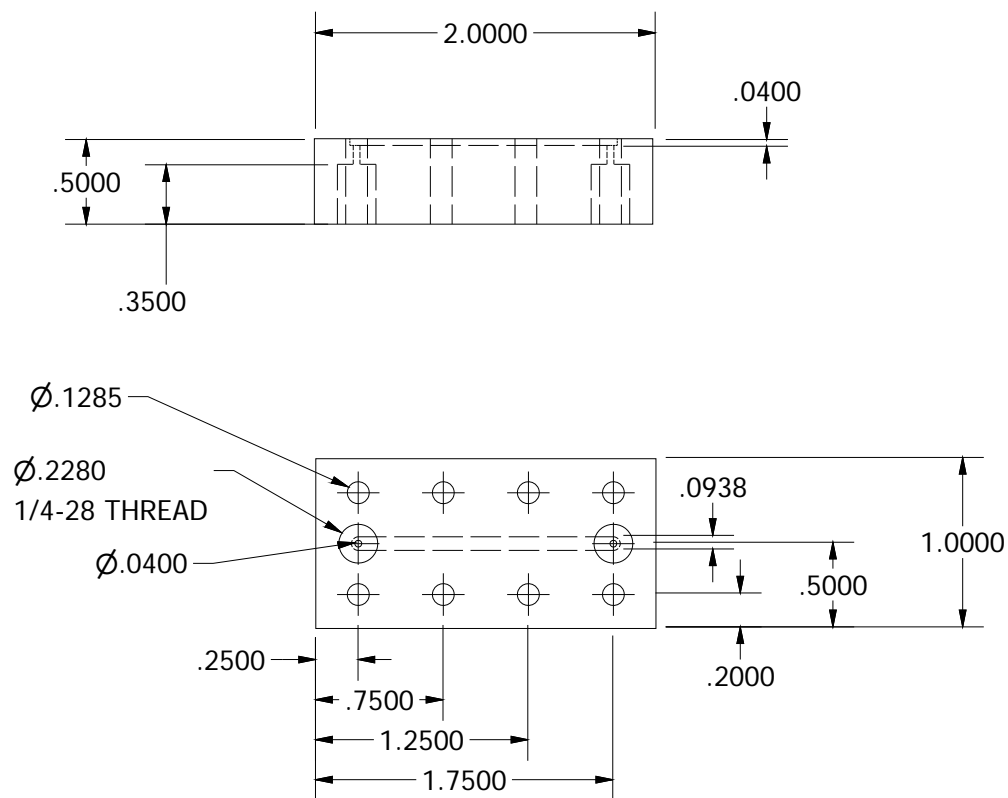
Drawing of half of Design 1 separator. All dimensions given in inches.
